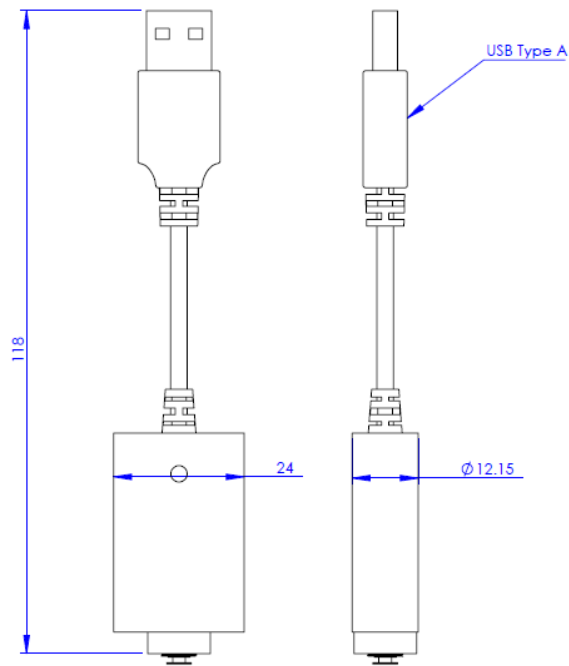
Diagram and dimensions of the Ghost - USB Charger. All dimensions are in mm.
